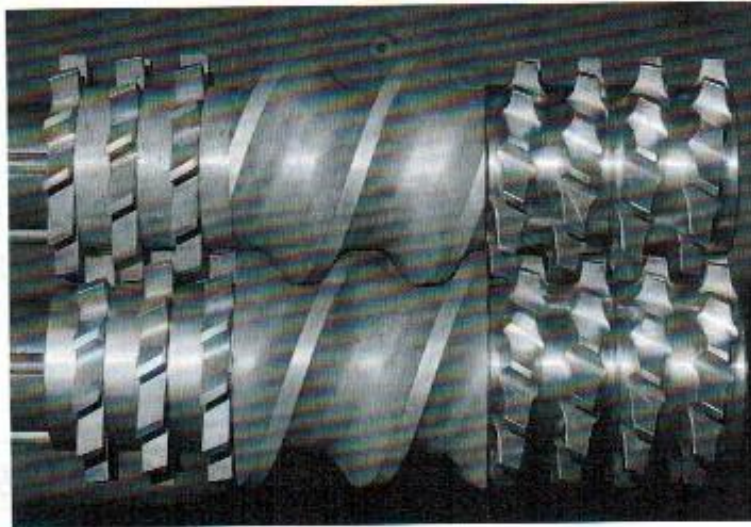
Mixing elements on a Berstorff ZE90A. Parallel gear rings on the left and gears cut on a helix. From Todd (1998).
